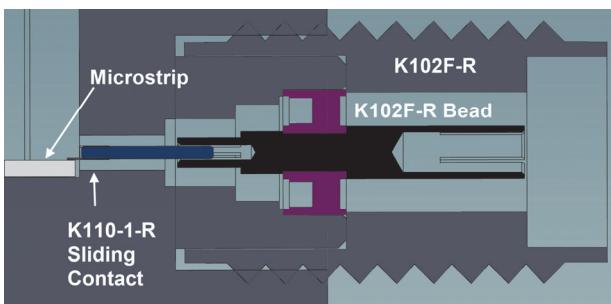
Single bead assembly using Anritsu K102F-R, pin and K110-1-R sliding contact
